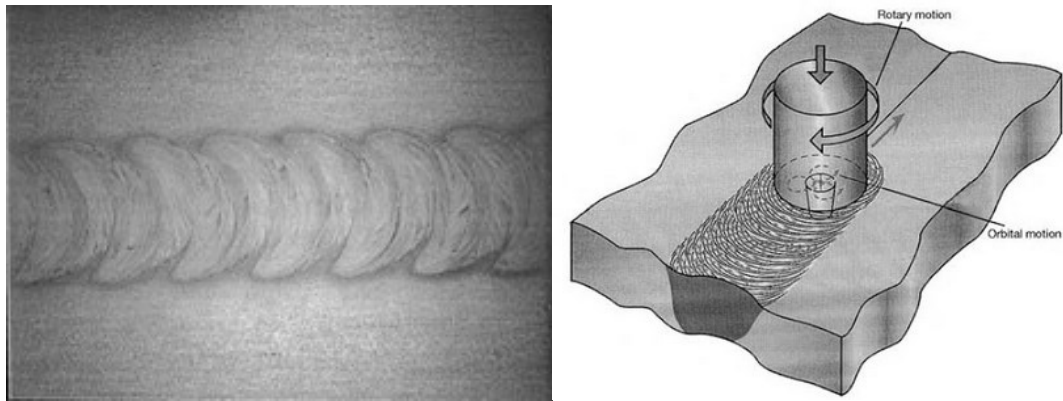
Top view of weld produced by Re-Stir FSW (left) and Com-stir tool movement (right).
